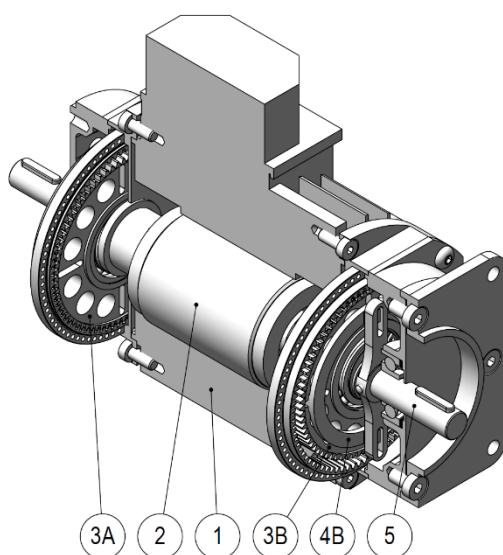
Internal structure of integrated gearbox: 1) stator with stator winding and ring gears, 2) squirrel cage with carriers, 3A) 3B) satellites, 4A), 4B) Oldham couplings, 5) output shaft.
